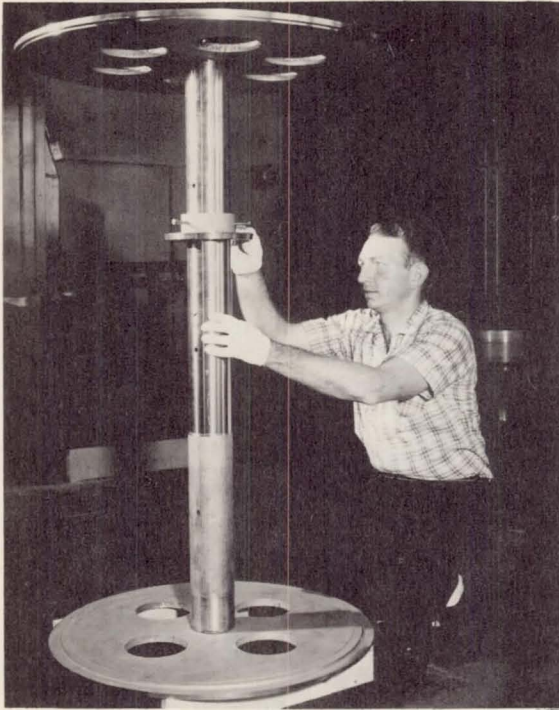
Shaft fixture for KIWI engine. Furnace brazing.
